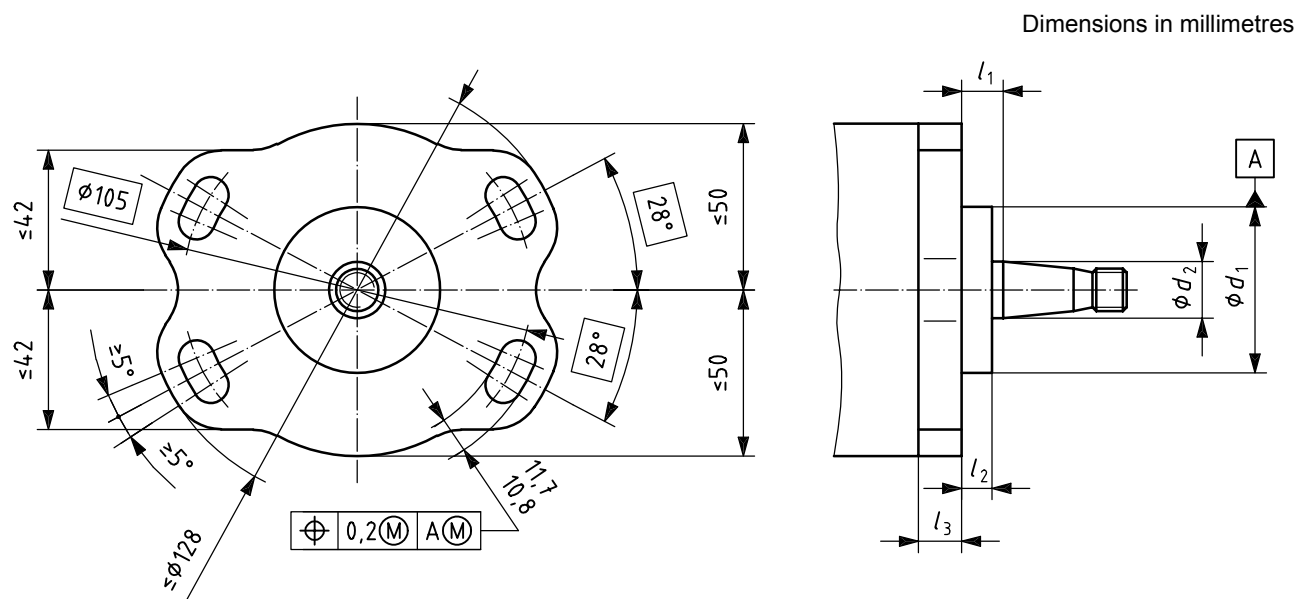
Fuel injection pumps — Type 3 end-mounting flange
